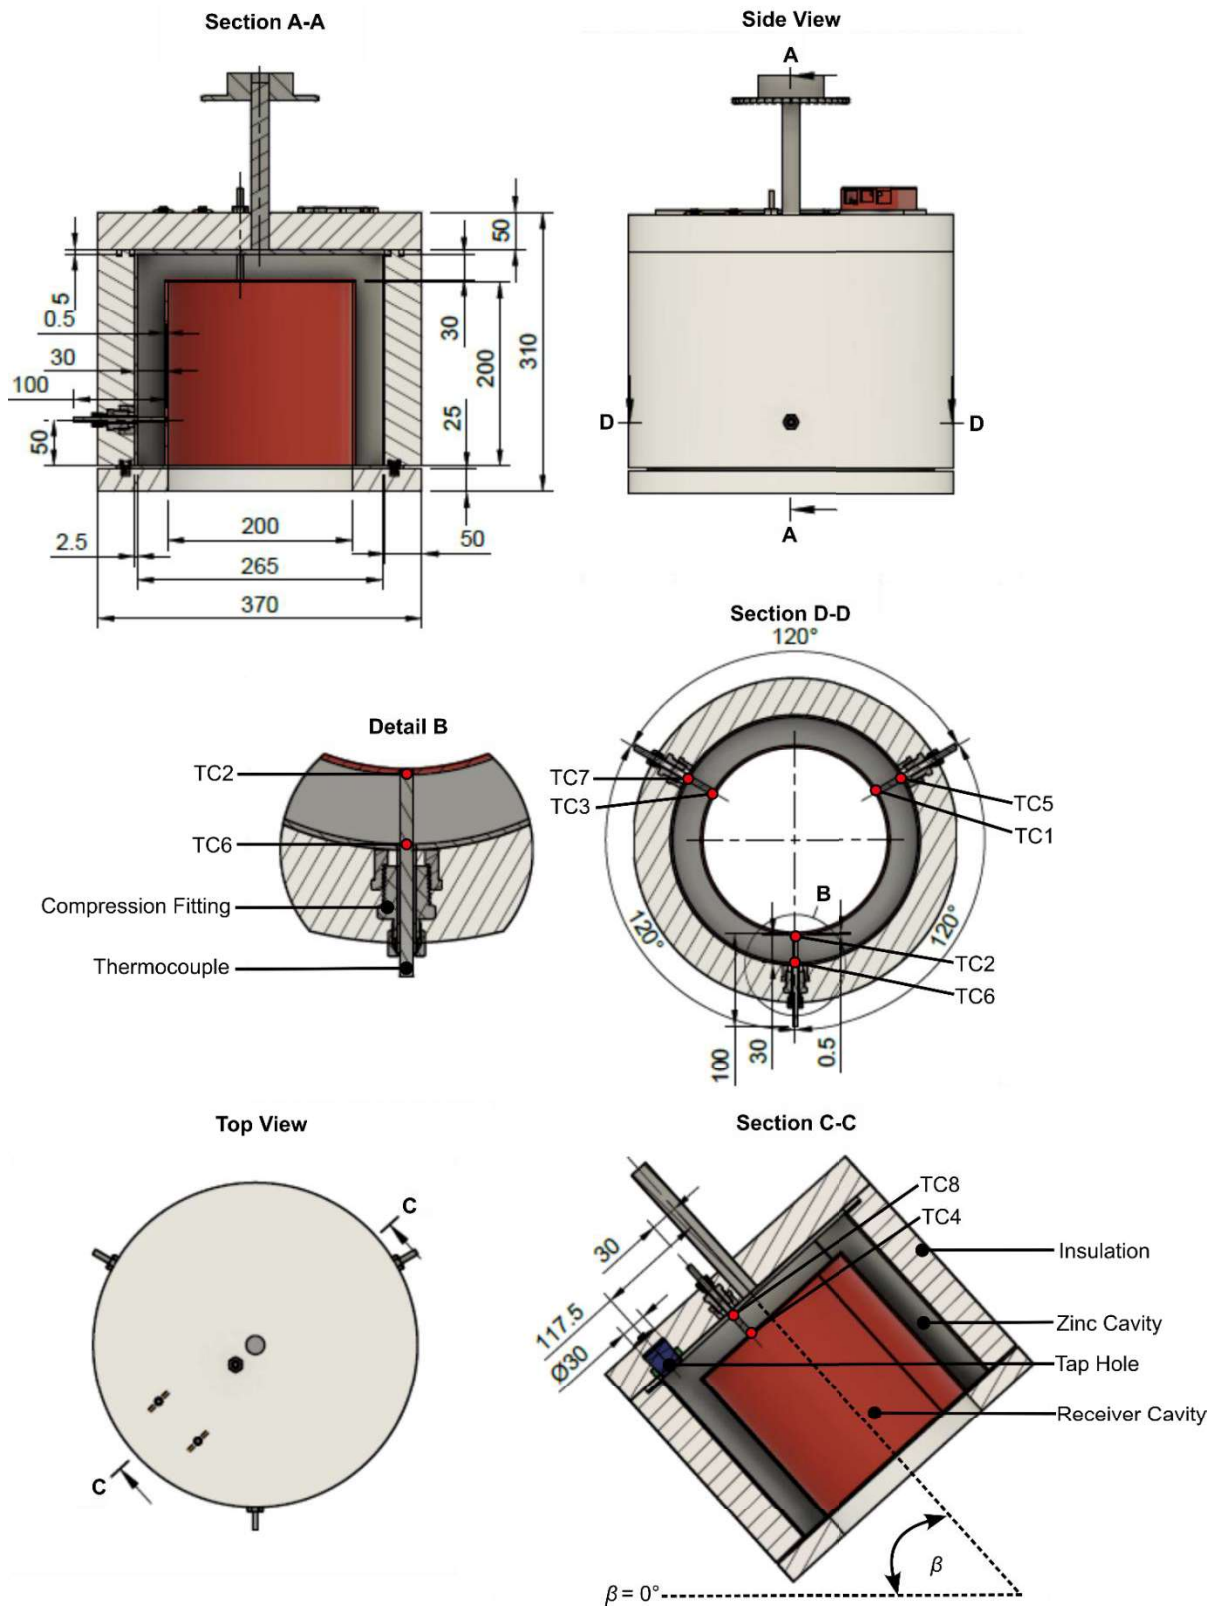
The receiver design showing the major dimensions and the thermocouple positions.
